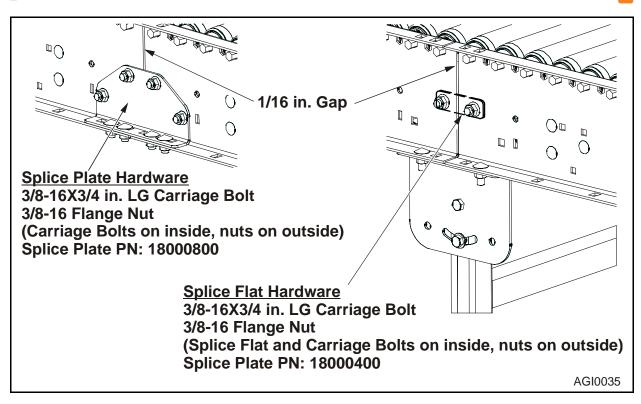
5 Splicing Adjoining Sections with Floor Support and Splice Flat
